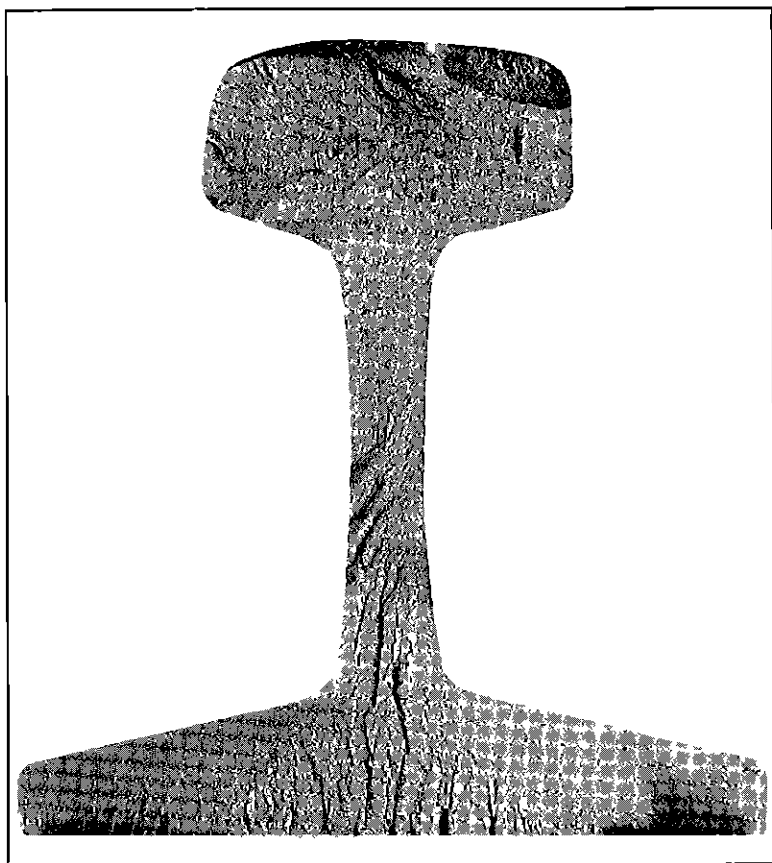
Head checked rail. Progressive fracture on gauge side of head, shown by darkened area. Checked surface 1 inch long by five sixteenths inch deep.
